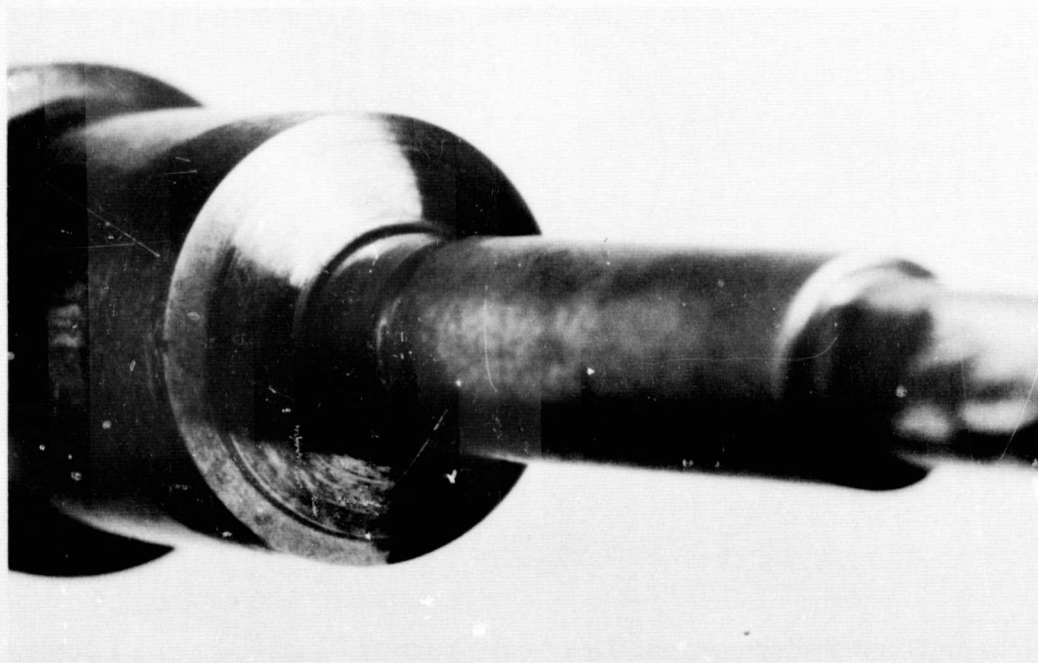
Condition of Hardface Seal Surface of Test Unit 6 After Testing (XPN-212)
